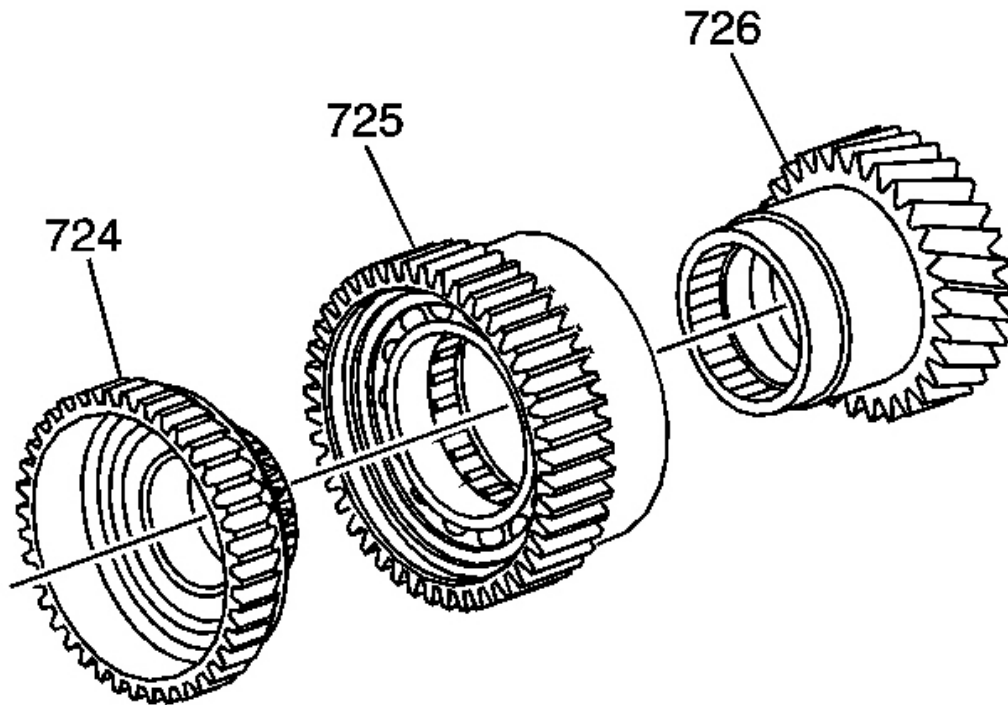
Coast Clutch Hub, Coast Sprag Assembly & 1st Drive Gear
